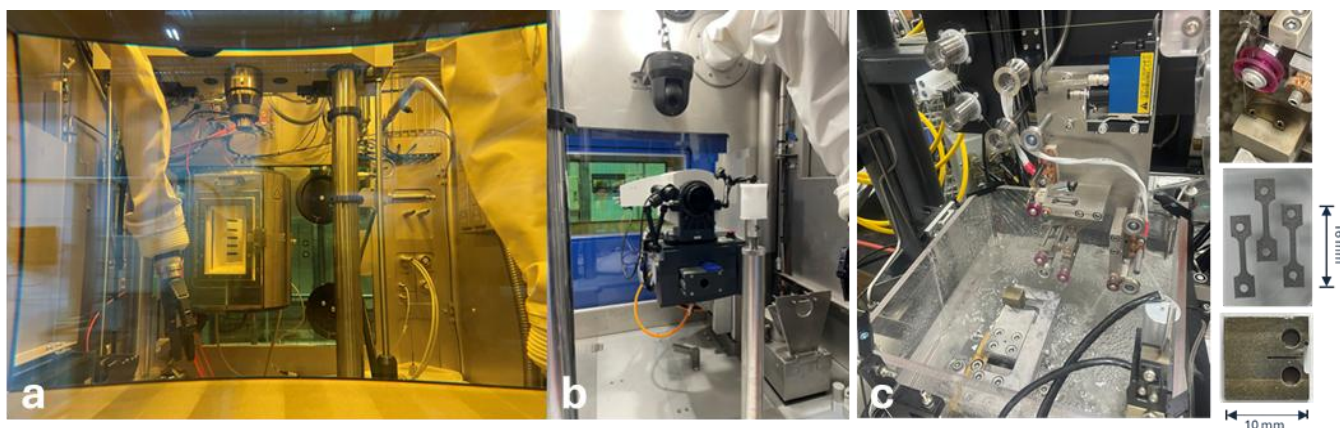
(a) and (b): In hot cell mechanical testing with non-contact strain measurement and (c) sample fabrication by WEDM cutting, milling and laser cutting.
